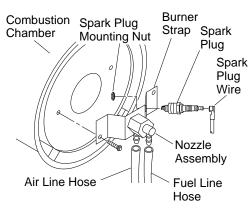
Spark Plug Removal, 35/55,000 BTU/Hr Models
